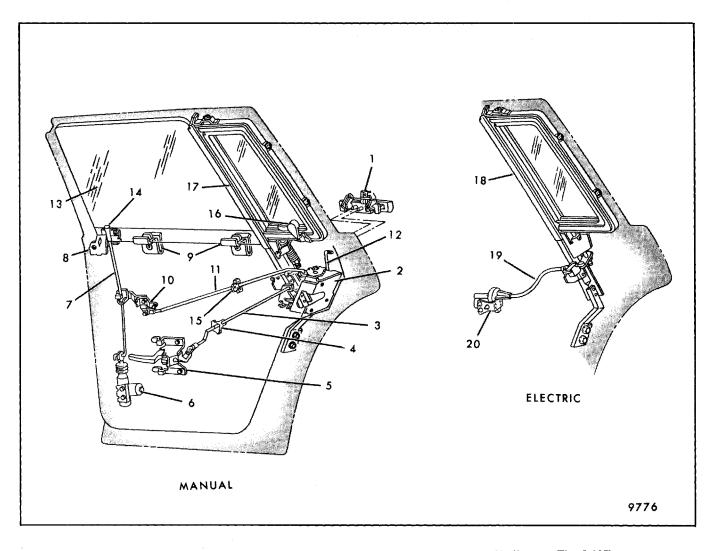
Rear Door Hardware - A Sedan Styles (A-35 Shown; A-09,19 Similar, see Fig. 5-137)
